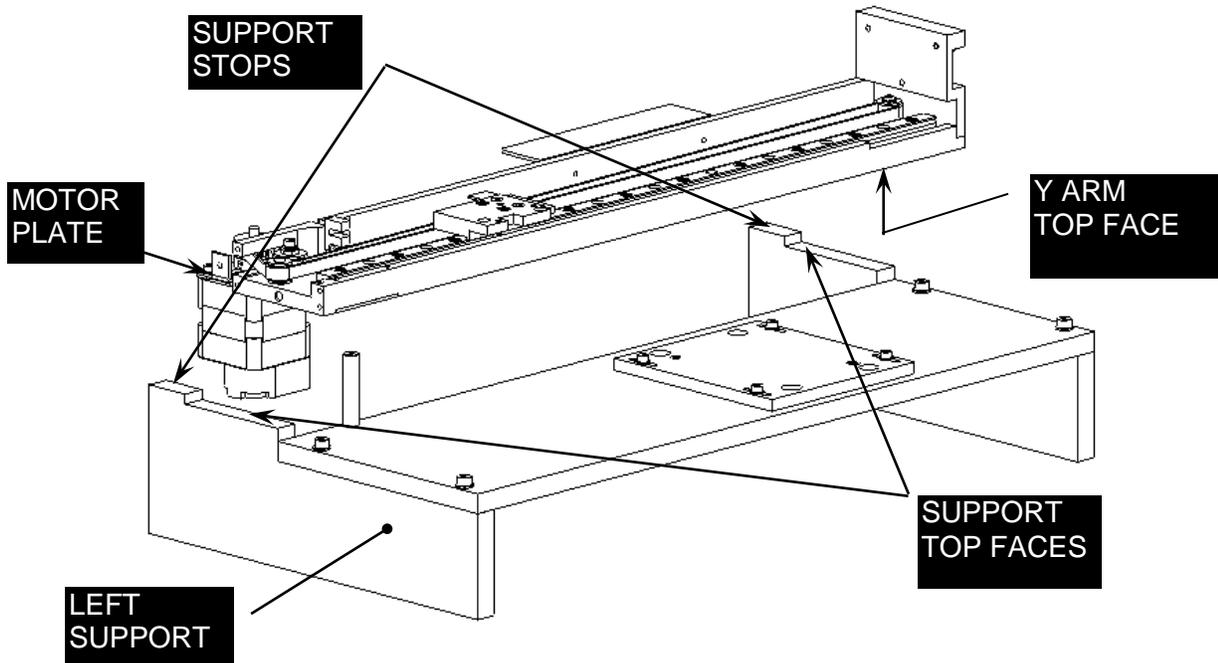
Y Assembly on Belt Tensioning Fixture
